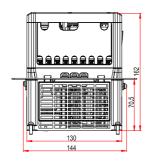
Dimensions of through hole mounting bracket and hole of MD500ET0.4GB to MD500ET3.0GB
